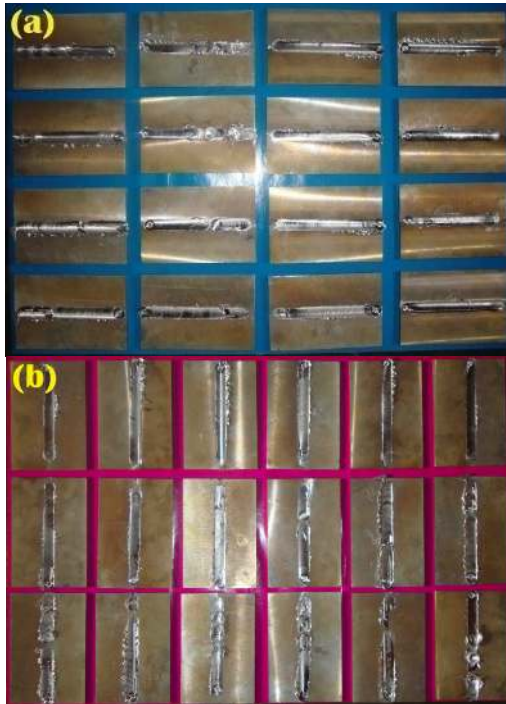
Photographs of a part of the joints fabricated during this investigation under combination of various process parameters using (a) Stepless cylindrical shoulder tool and (b) Stepped cylindrical shoulder tool
